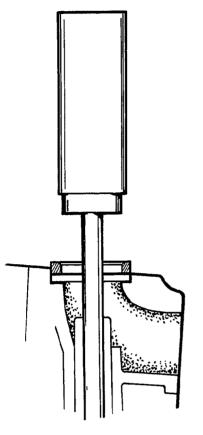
REMOVAL OF VALVE SEAT INSERT
